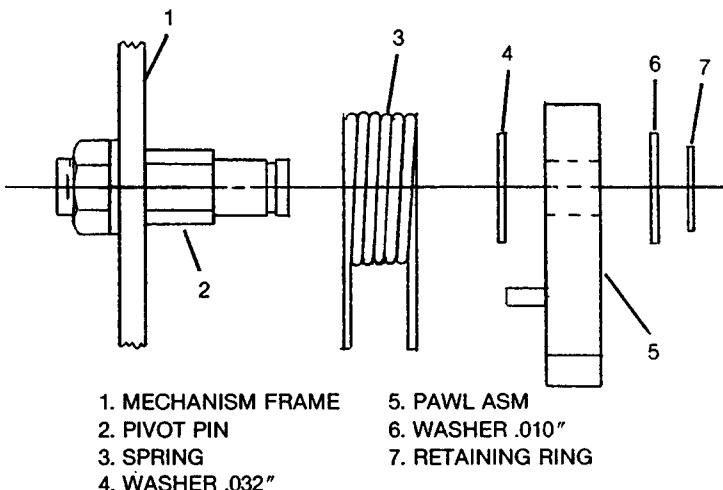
C — HOLDING PAWL ASSEMBLY DETAILS
